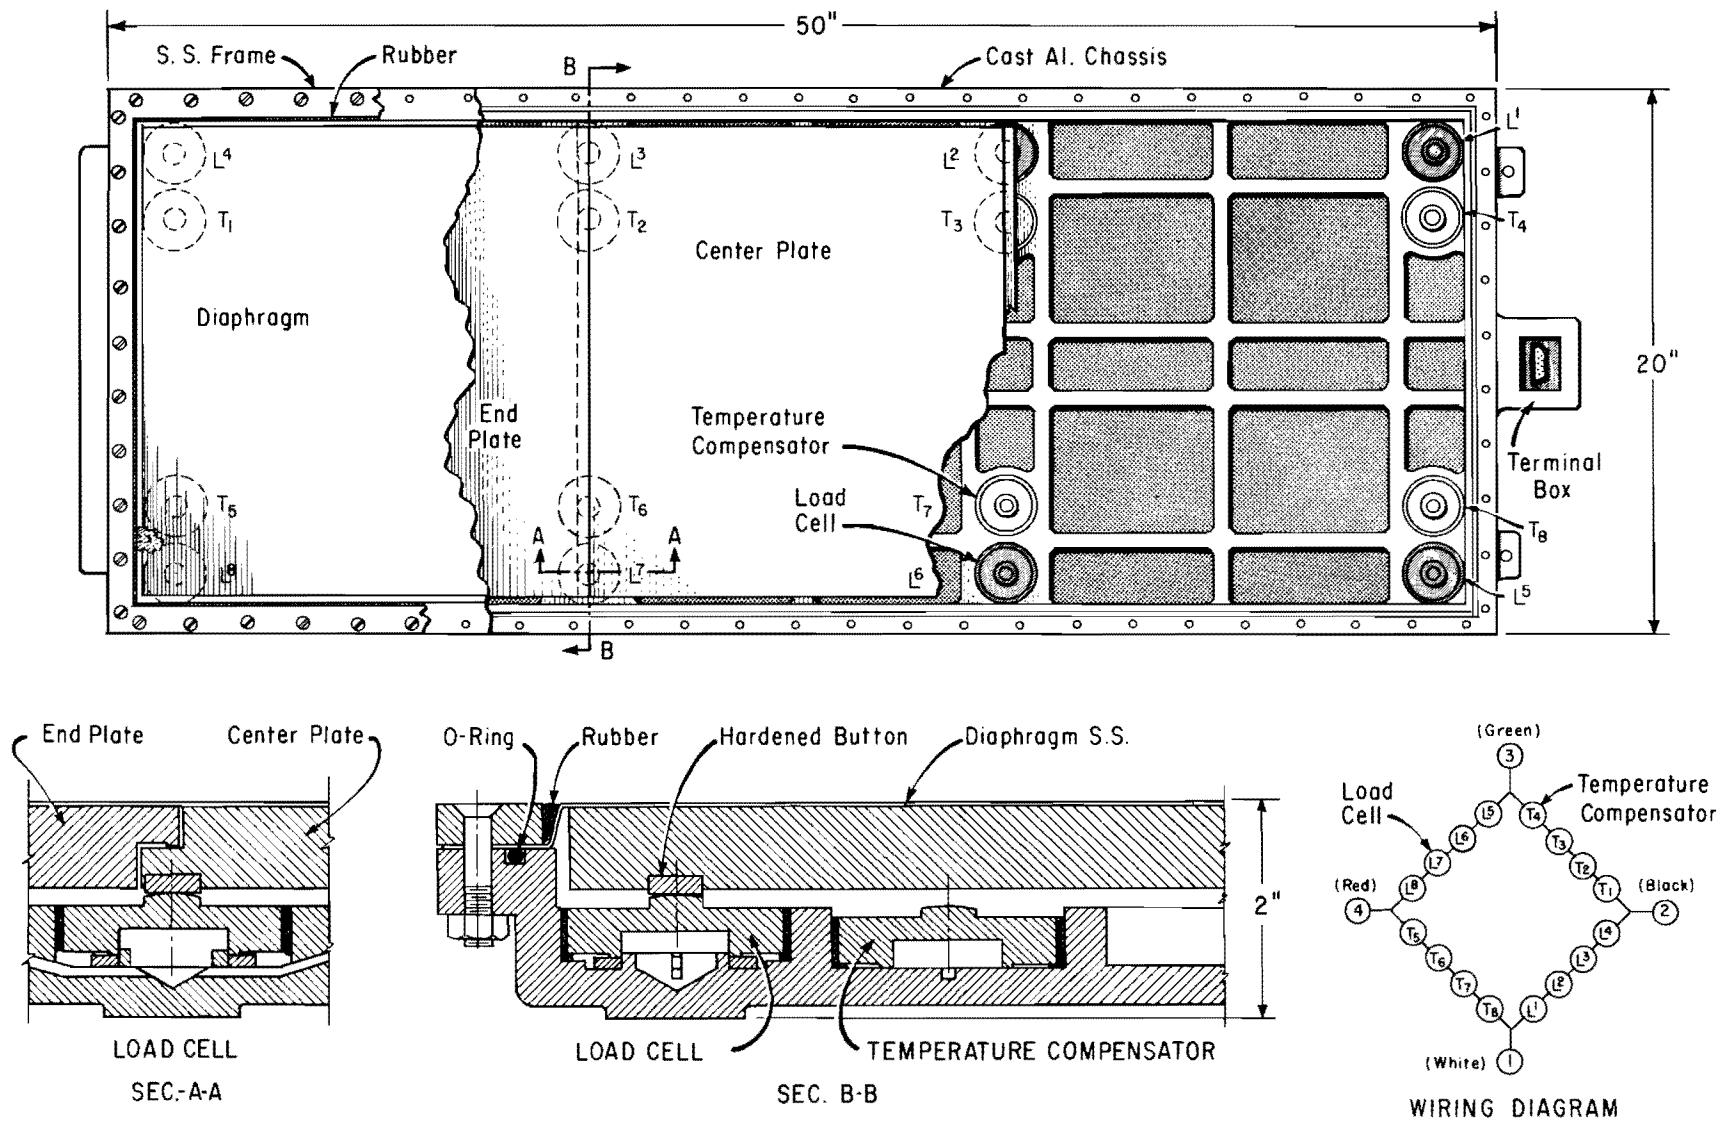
Cut-away top view and sections of transducer with cast aluminum chassis.
